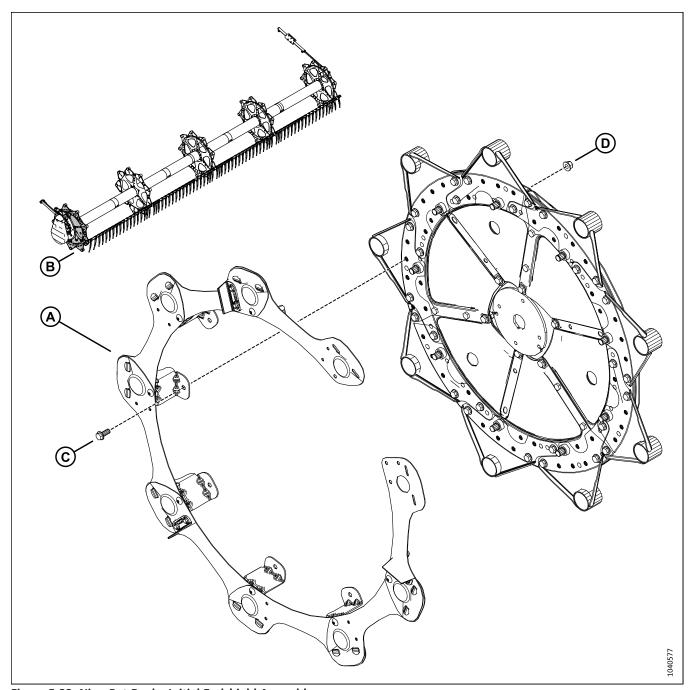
Nine-Bat Reel - Initial Endshield Assembly
